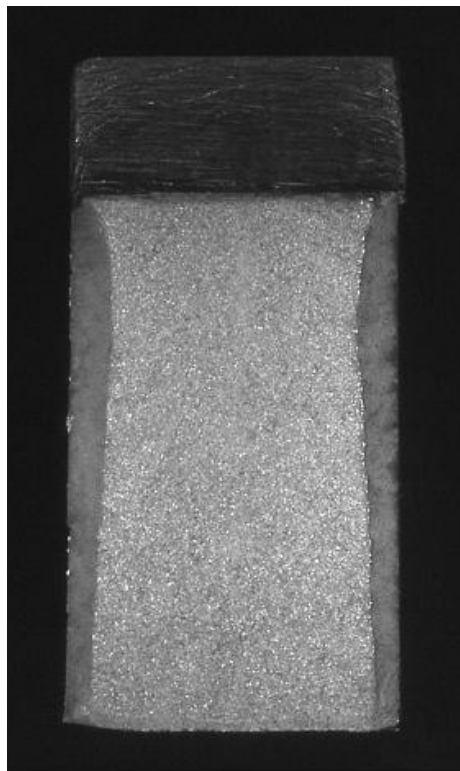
Fracture surface of Q&T specimen C LT-6.
